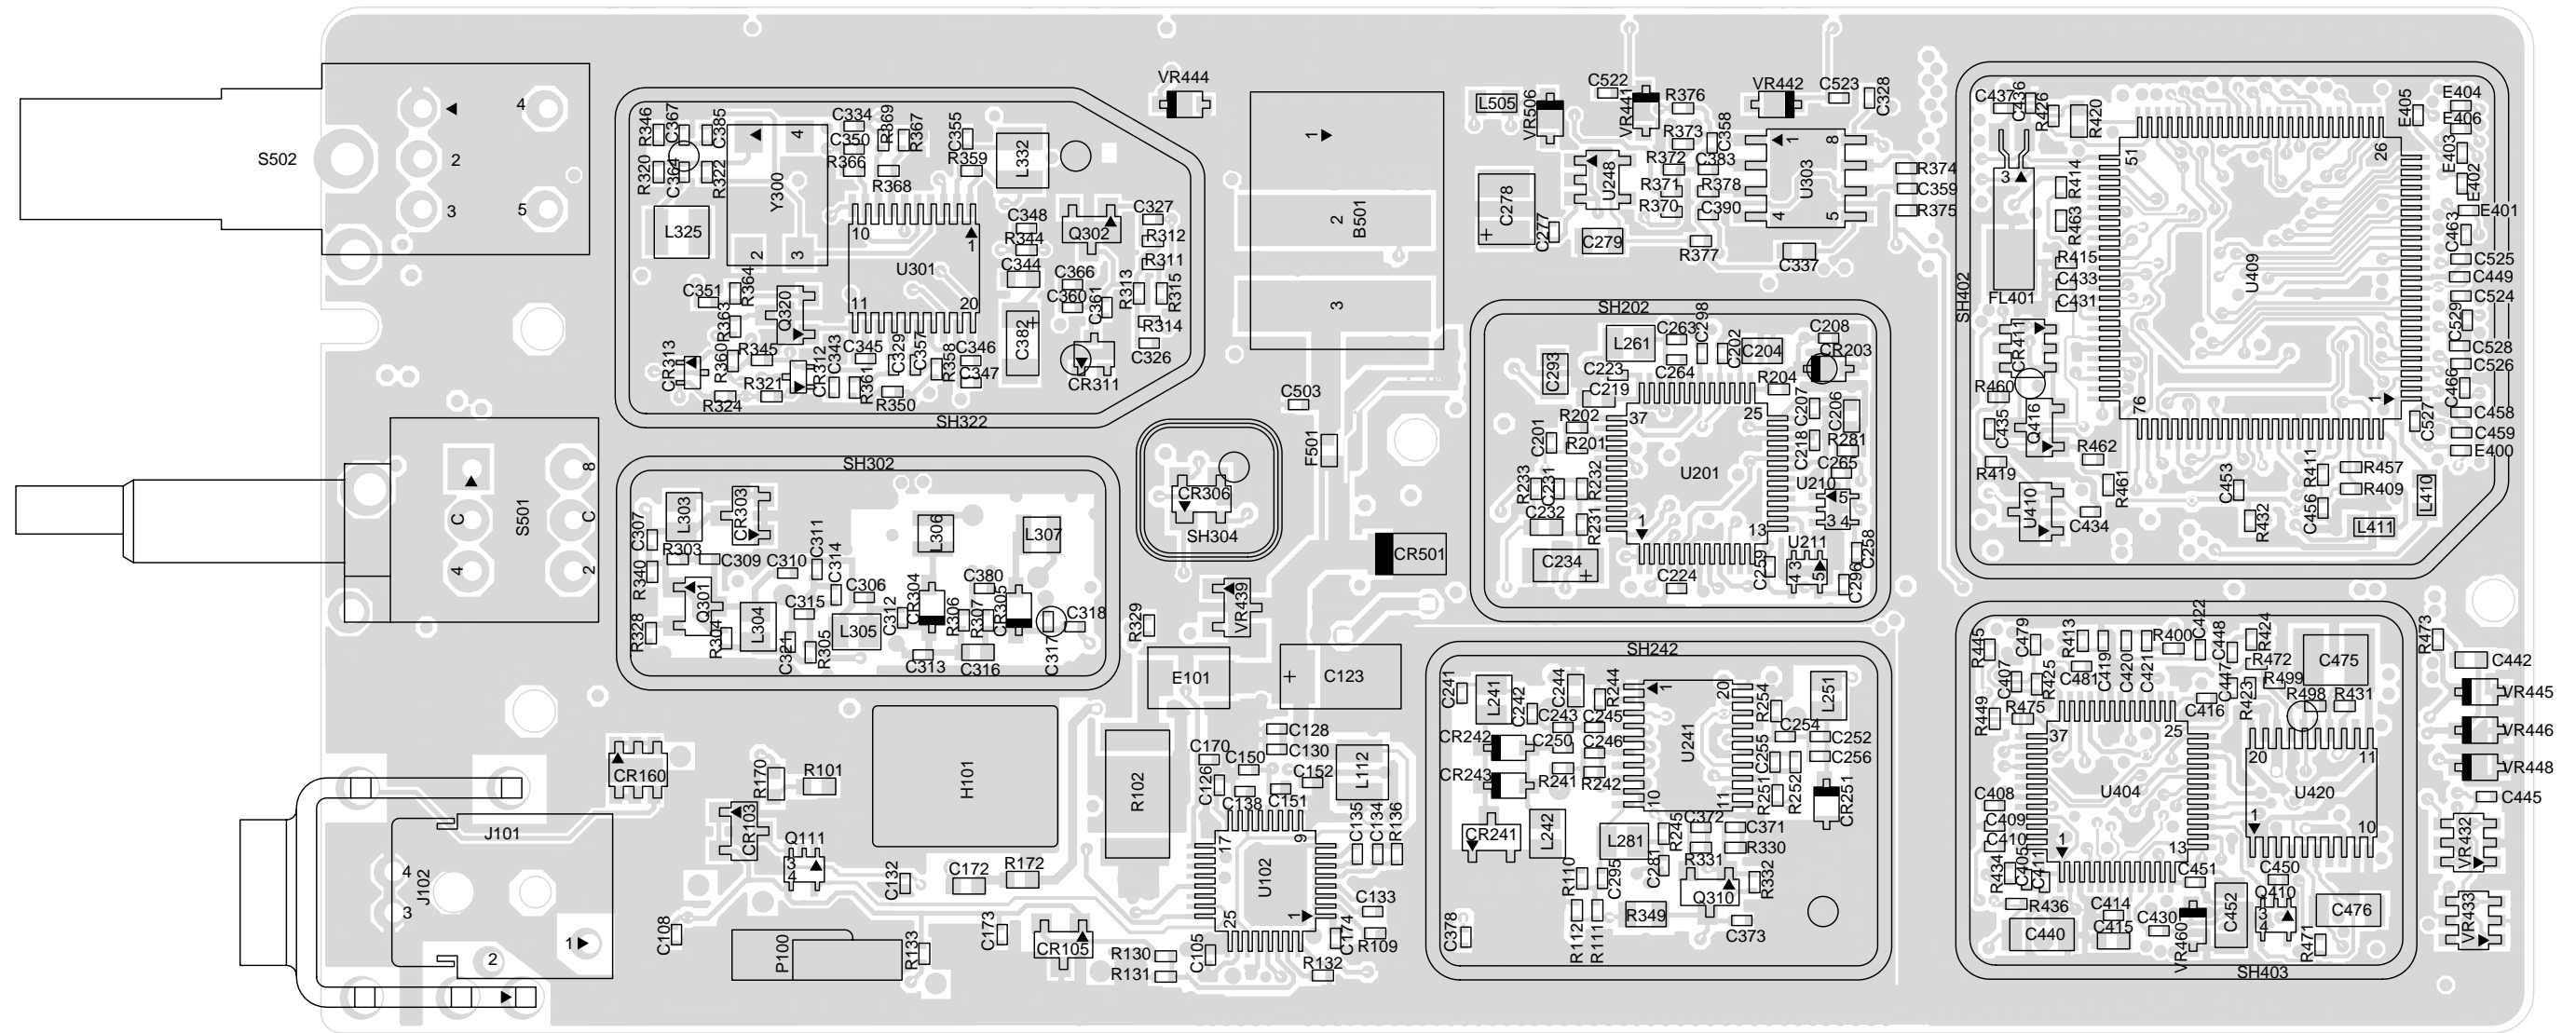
UHF (450-527 MHz) 5000/7000 Series Main Board Bottom Side PCB No. 8486686Z01
